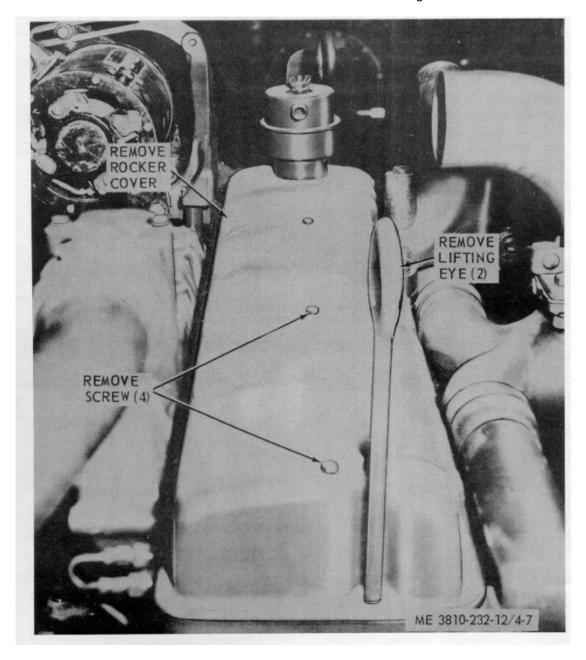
Crane engine rocker arm cover, removal and installation.
